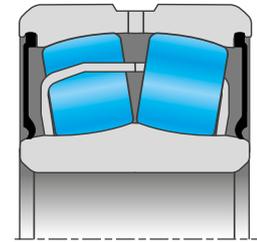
Cross-sectional diagram of the Ultage design with a drawn steel cage (EA)
